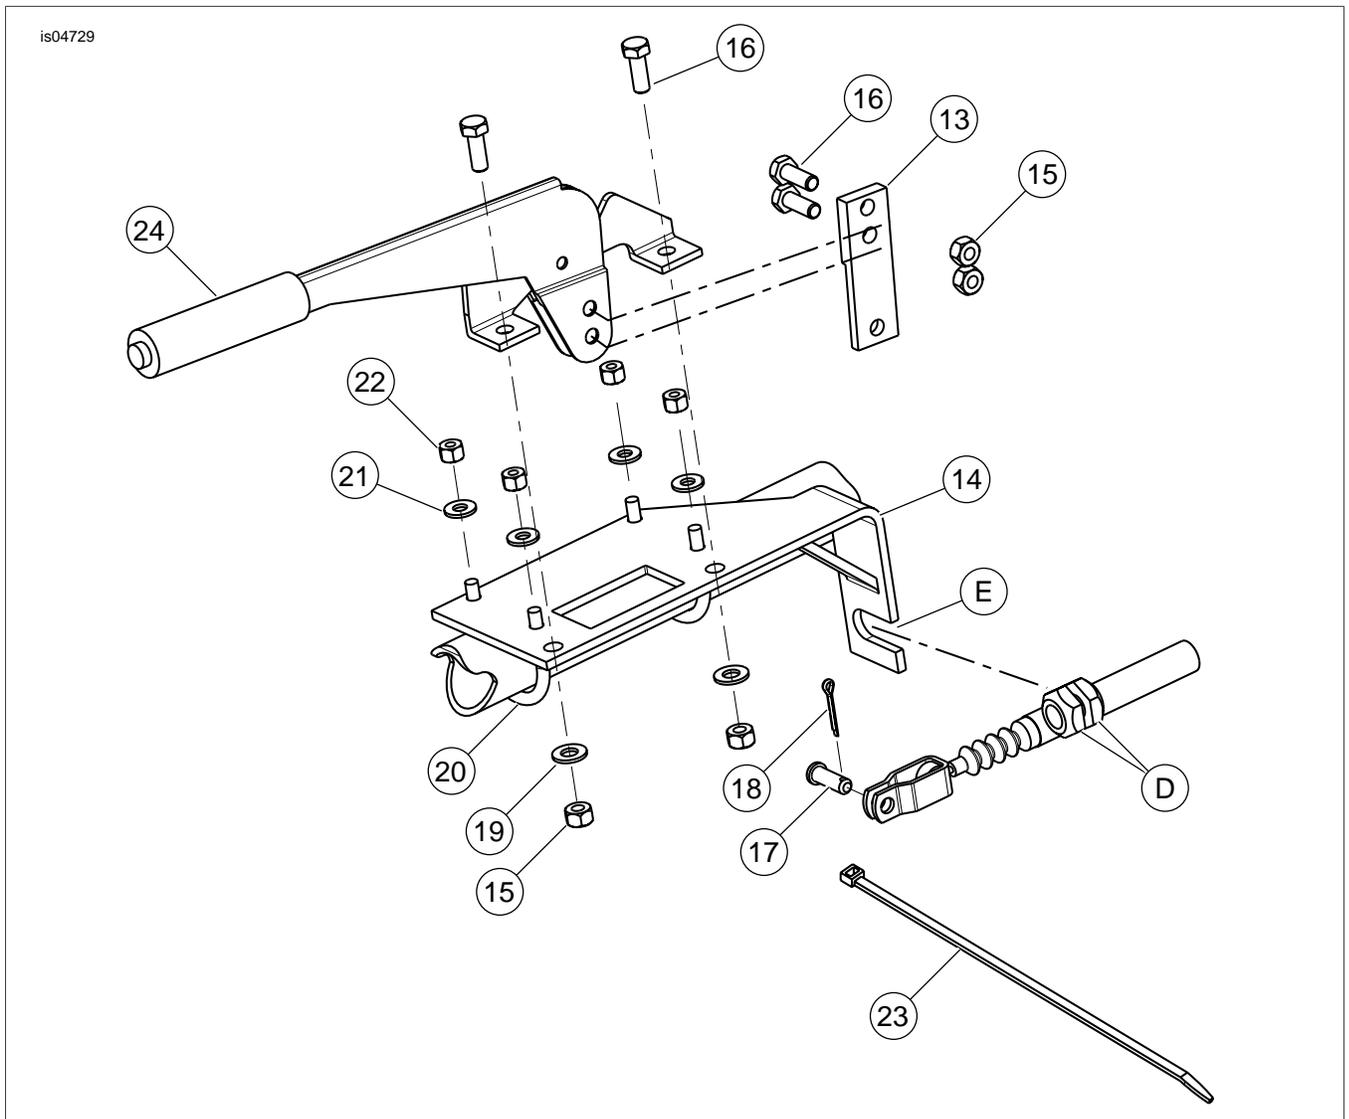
Service Parts: Lever Assembly and Mounting Bracket
